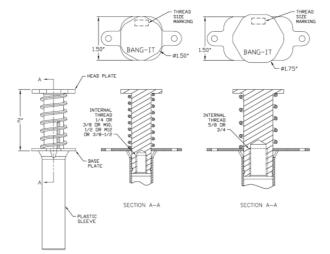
BANG-IT+ CAST-IN-PLACE INSERTS FOR CONCRETE FILLED STEEL DECK FLOOR AND ROOF ASSEMBLIES
